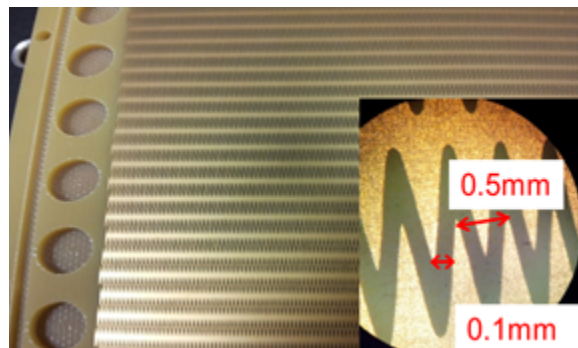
Printed circuit readout board with zigzag strips with a microscope picture of the zigzag structure in the inset.
